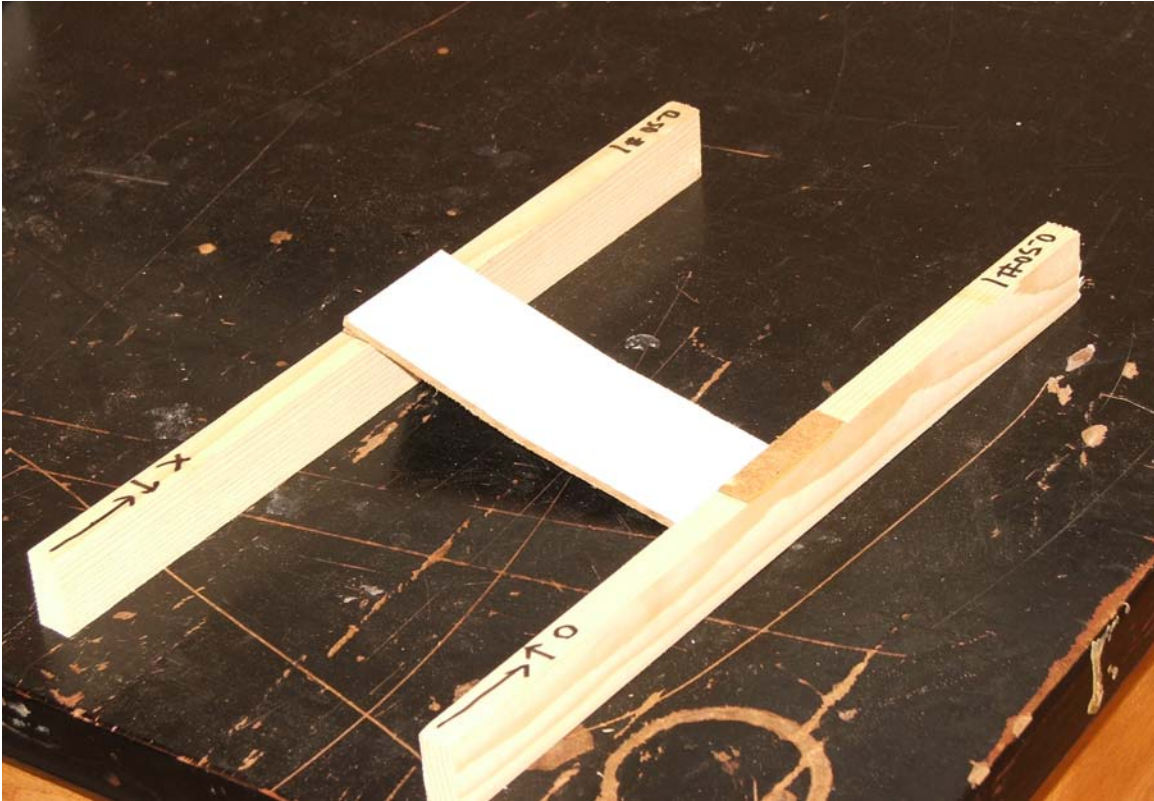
Failed Glued Bending Test Specimen with Stile Width of 1/2 in.
